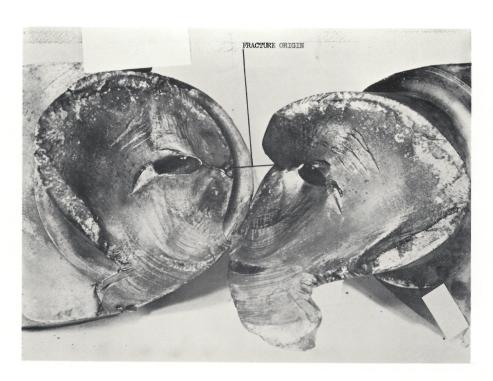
Fatigue Failure of Complex Type in Crankshaft Initiating from Subsurface Inclusions.
